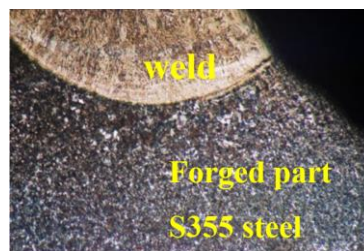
Welded joint between forging part S355 and G3Si1 filler metal
